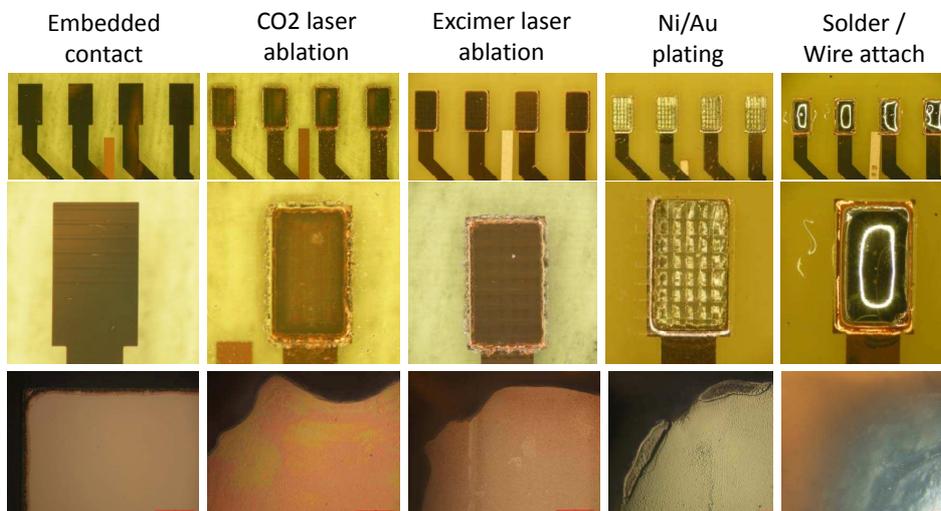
Pictures and close-ups of contact pads which are (from left to right): Embedded, CO₂ laser opened, Excimer laser cleaned, NI-Au plated and soldered.
